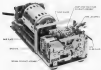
Ball-Bearing Driven Mechanism (Motor Driven)
